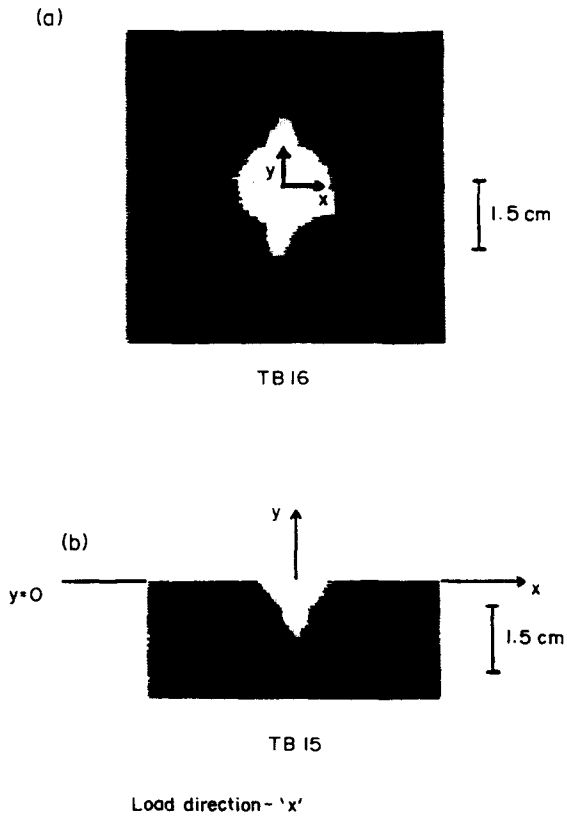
C-scan maps of damaged specimens. (a) Specimen TB16. (b) Specimen TB15.
